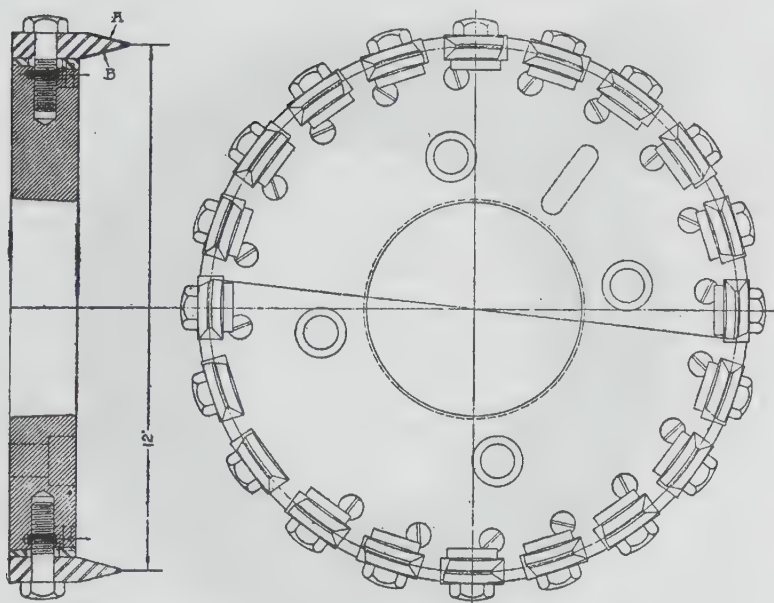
CUTTER FOR FINISHING HELICAL BEVEL GEARS.
